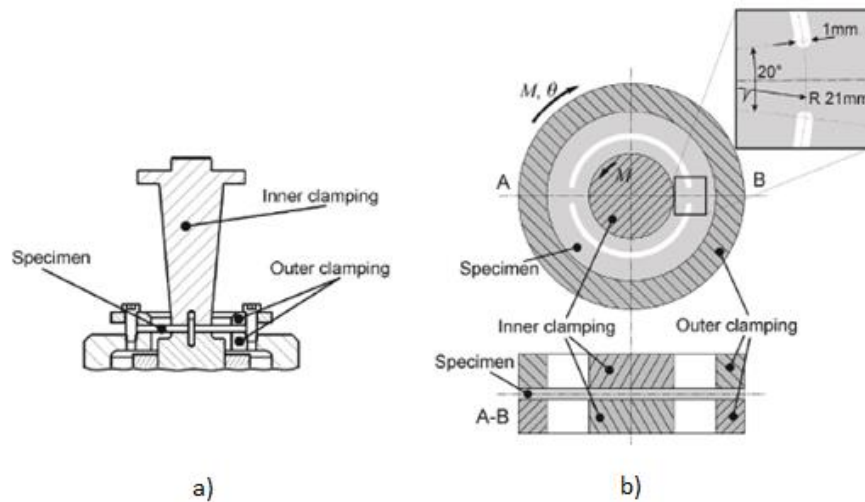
In-plane torsion test. a) General set up, b) Specimen geometry and visualisation of its assembly in the test machine. [53]
